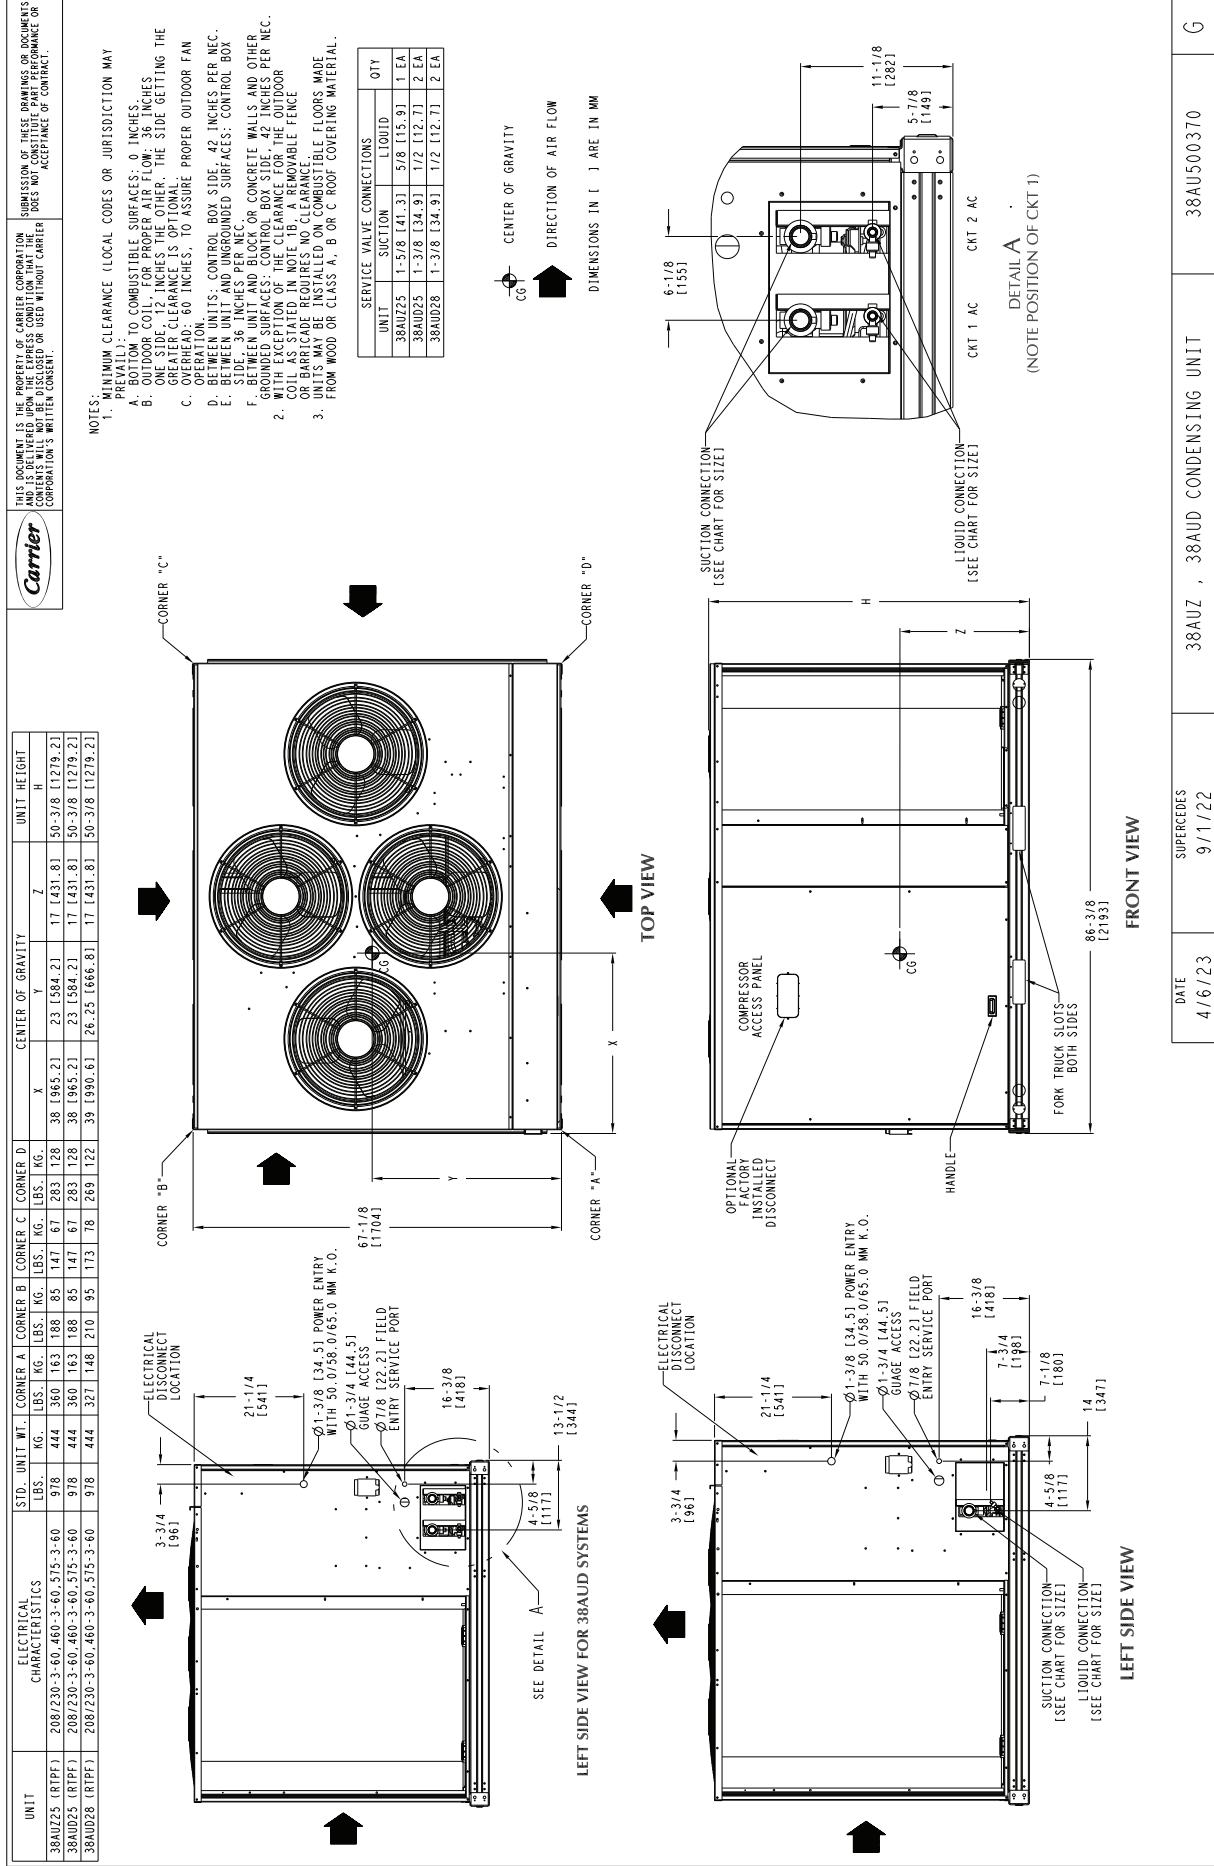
38AUZ 25 / 38AUD 25-28 Base Unit Dimensions
